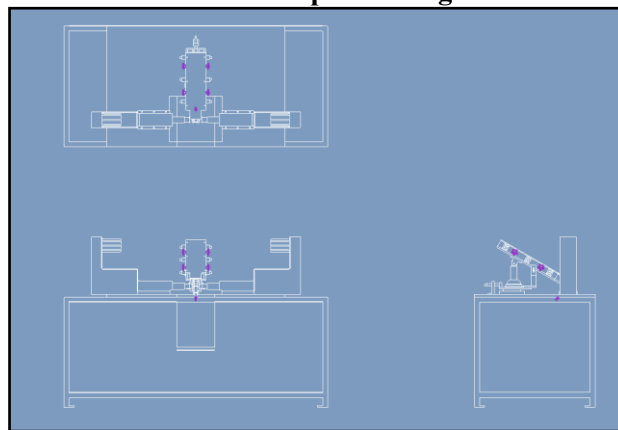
Concept Drawing of the Cot Chamfering Machine
